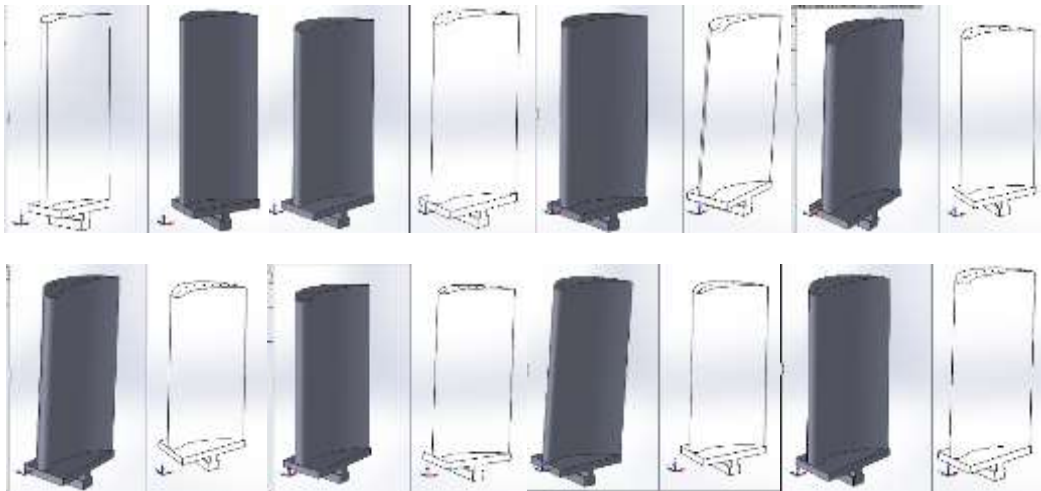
3D view of first stage turbine rotor blade profile without and with holes (6-12 holes)
